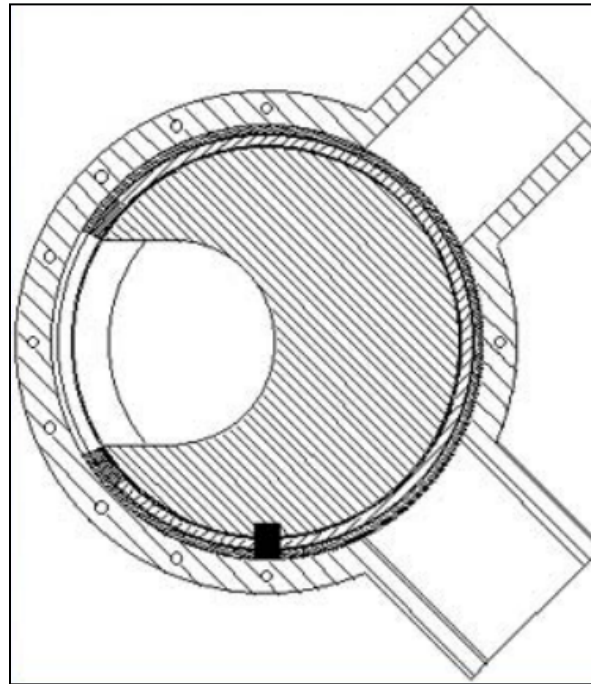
Rotating cylinder valve spring seal system (Lawes, 2002).
